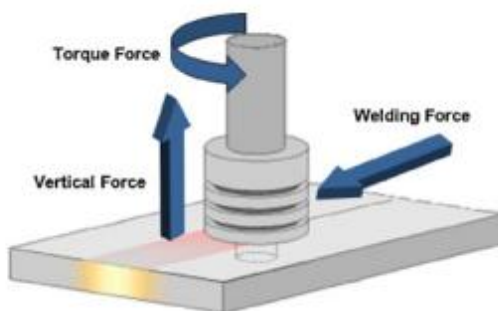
Forces acting on the tool and workpiece during FSW [57].
